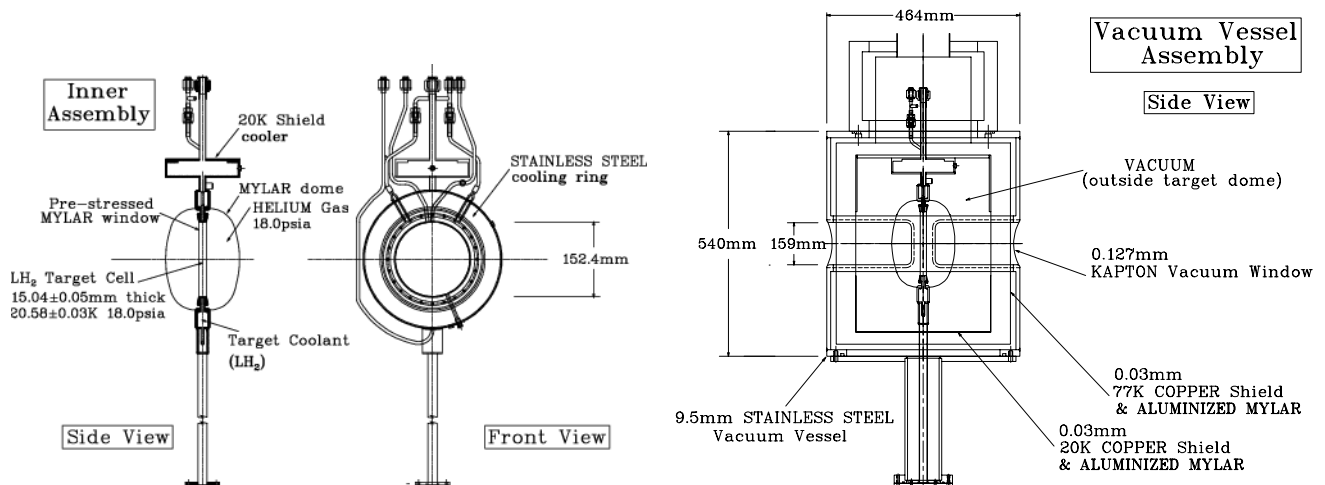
Left: LH₂ target inner flask assembly, showing target dimensions and operating temperature and pressure. Right: Target assembly showing placement of target flask assembly within outer vacuum vessel.
